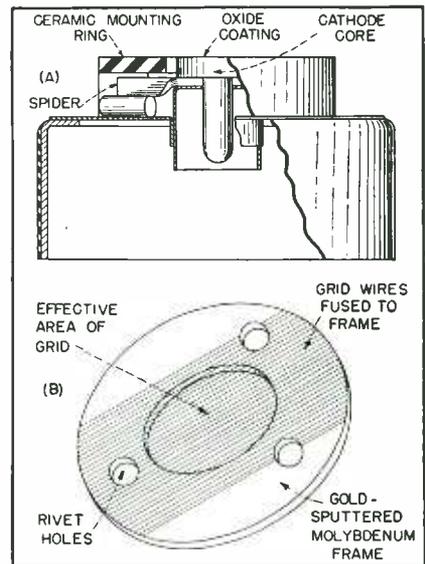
Cutaway view of cathode sub-assembly (A) and grid structure (B)
